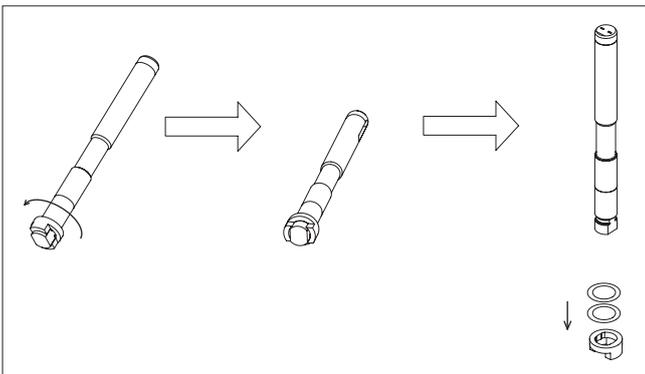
Detaching the thrust ring in sizes 1" and 1 1/2"
